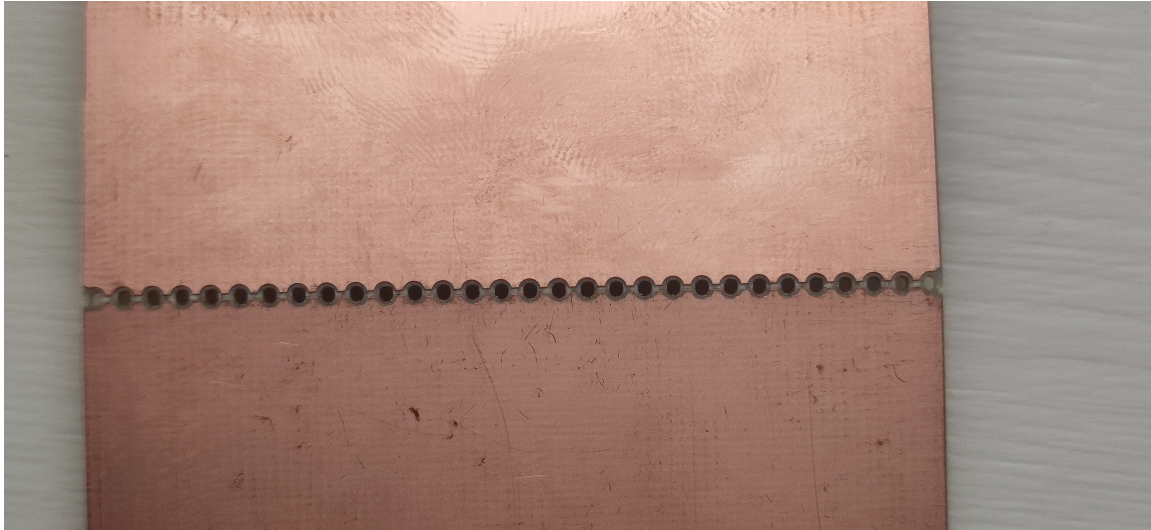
Bottom side of the mechanical test specimen "Eco2" after the three-point-bending test.
